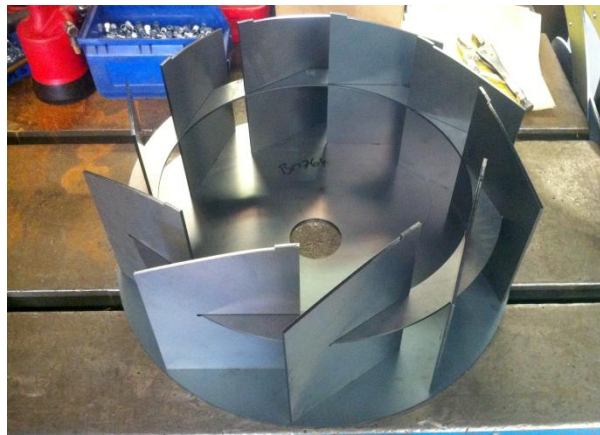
V2-5 impeller construction with single-piece blade and ring type inter-shroud.
